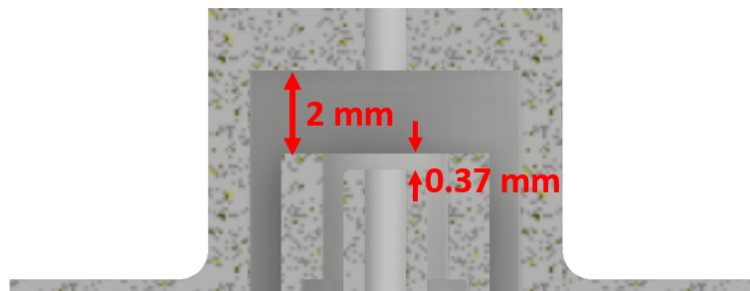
CAD drawing cutaway depicting gap distance between cap and nozzle and the height difference between the soap and helium tube
